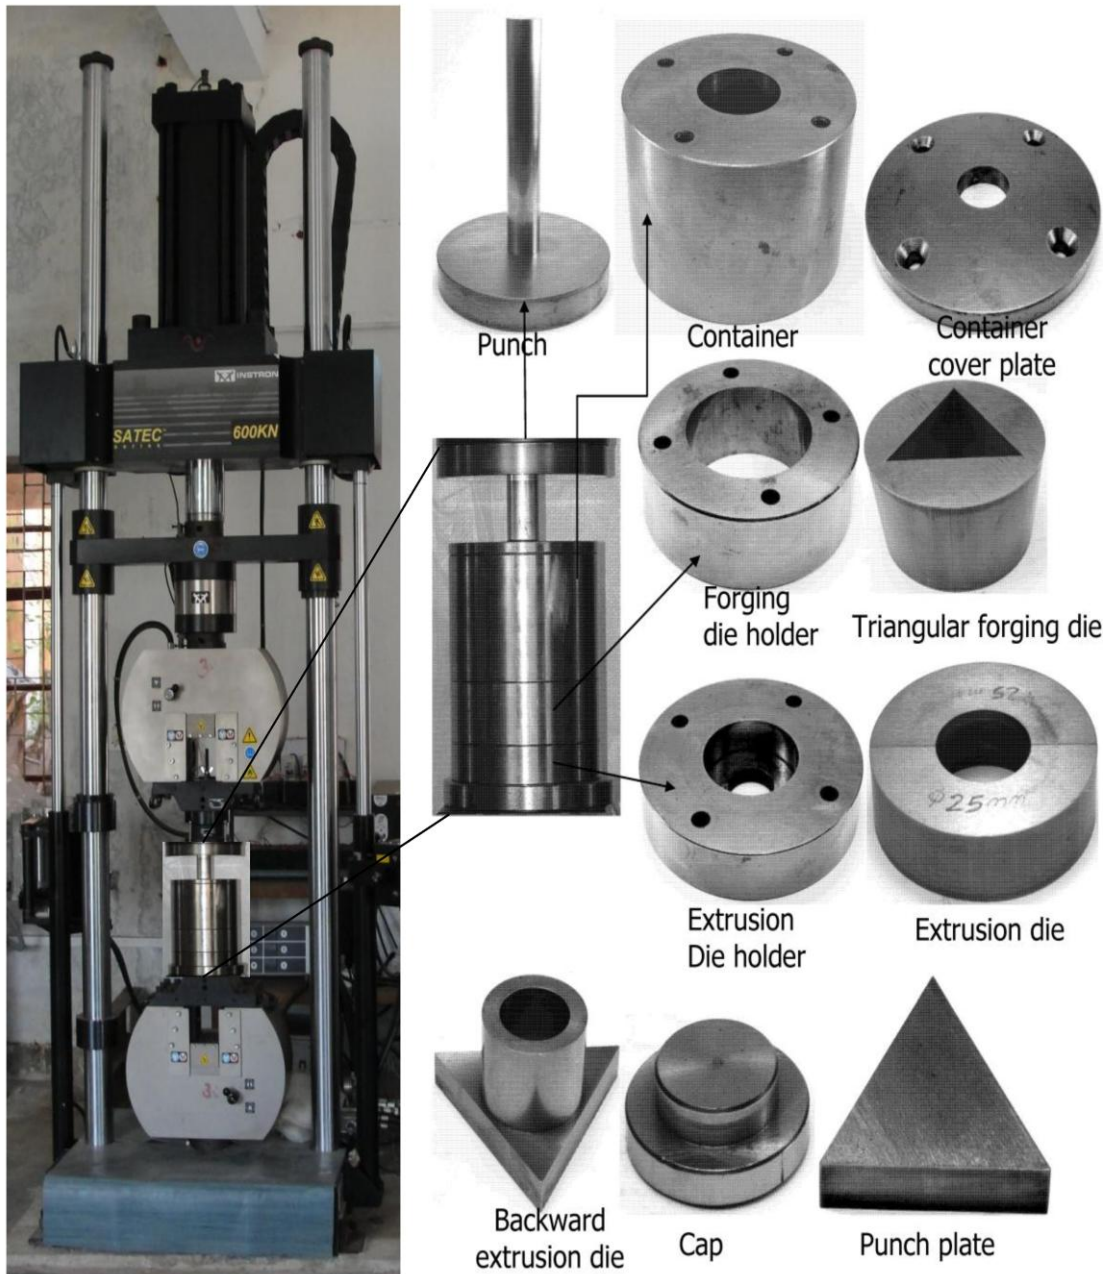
Photograph of INSTRON® 600KN machine with assembled setup
